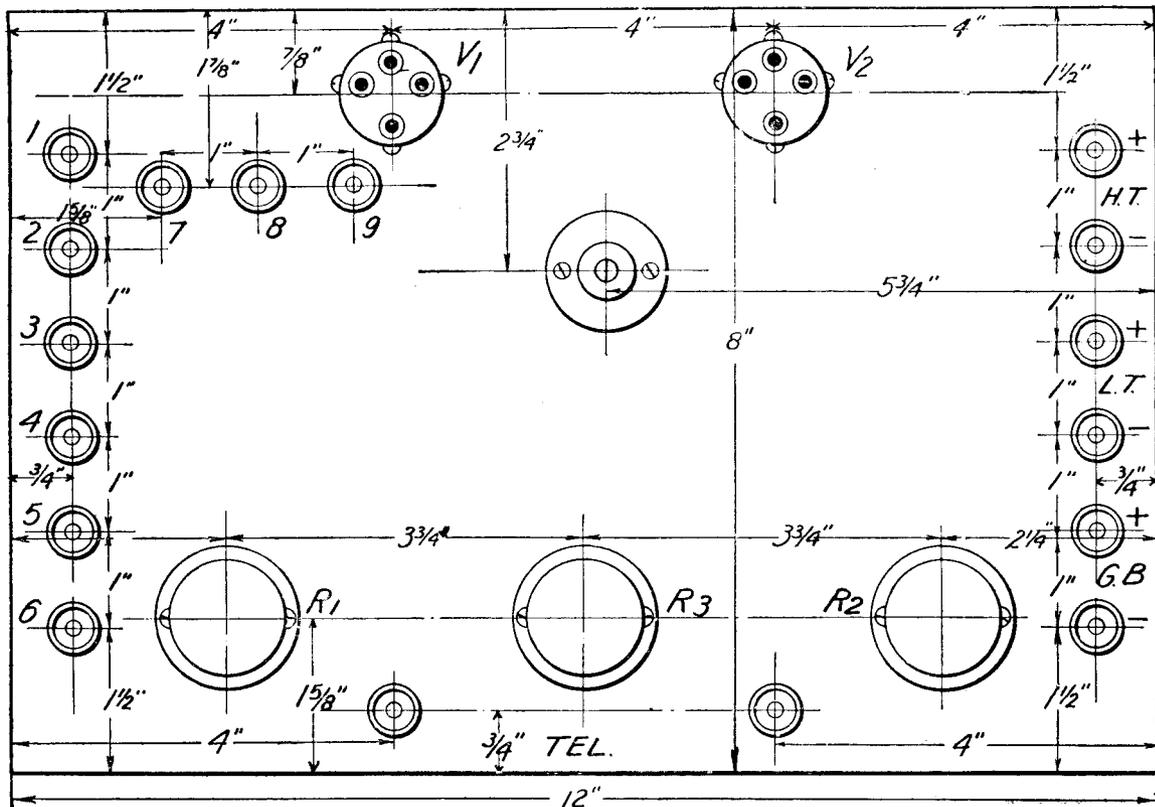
A half-size diagram of the panel, showing how to drill the holes and mount the parts.
